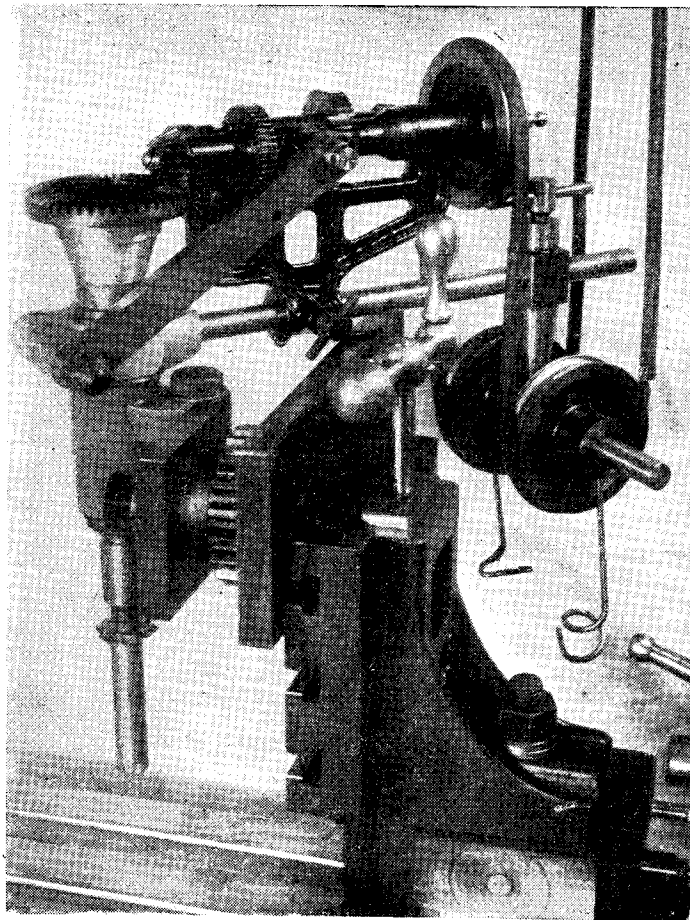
A back-geared bevel-driven attachment mounted on the vertical slide
